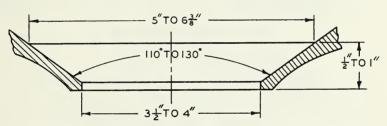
Enameled cast-iron kitchen sinks—outlet dimensions.
